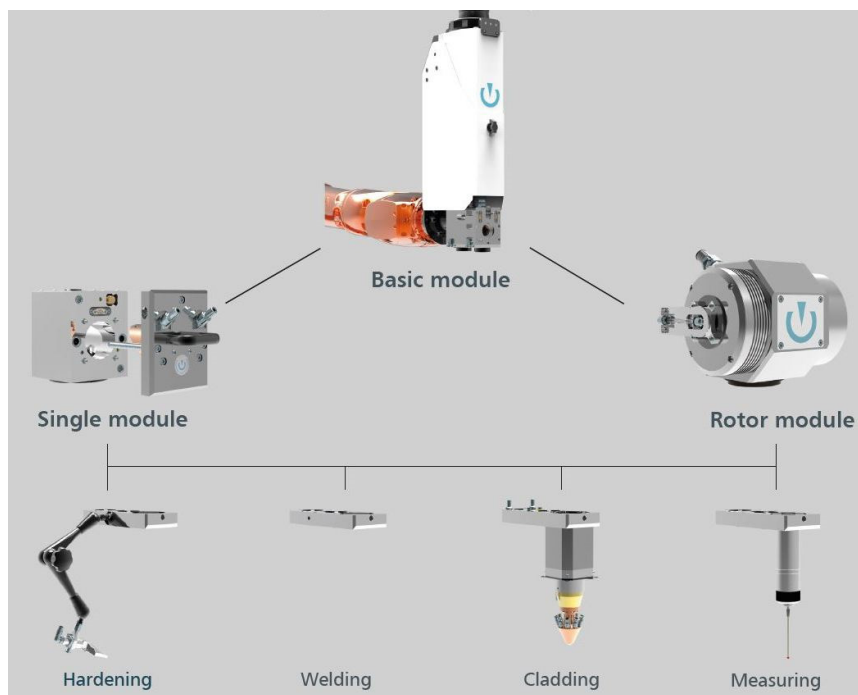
ERHEAD® VARIOSPOT 25. The version with pluggable mirrors is shown on the left. The version with rotor module is on the right side. On the bottom the different tools for hardening, welding, cladding and measuring can be seen.
